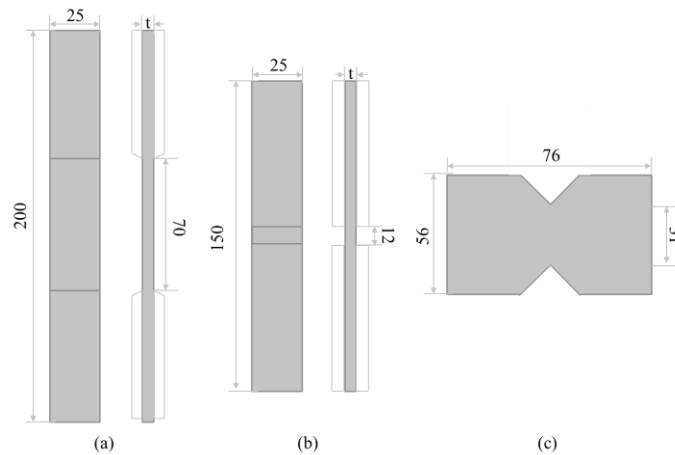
Representative test coupon geometry for (a) tensile test (b) compressive test (c) V-Notch in-plane shear test. ‘t’ stands for specimen thickness. All dimensions are in ‘mm’.
